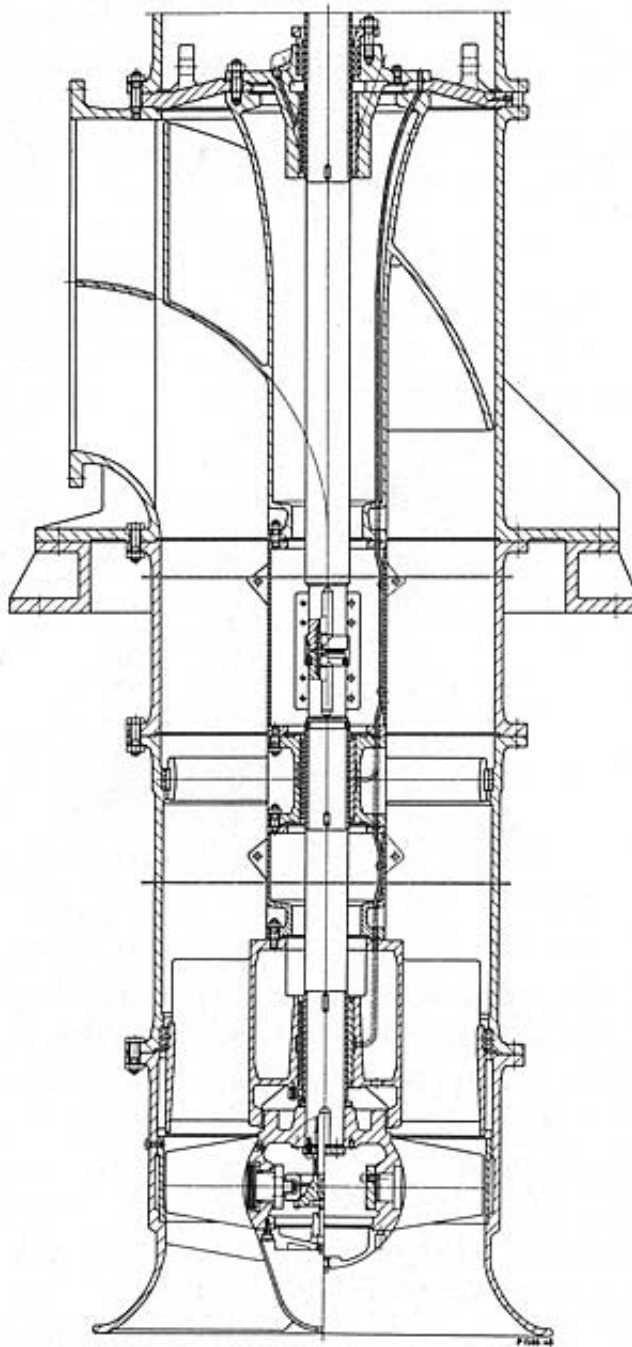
Propeller pump as tubular casing pump left-hand side: variable pitch blades
